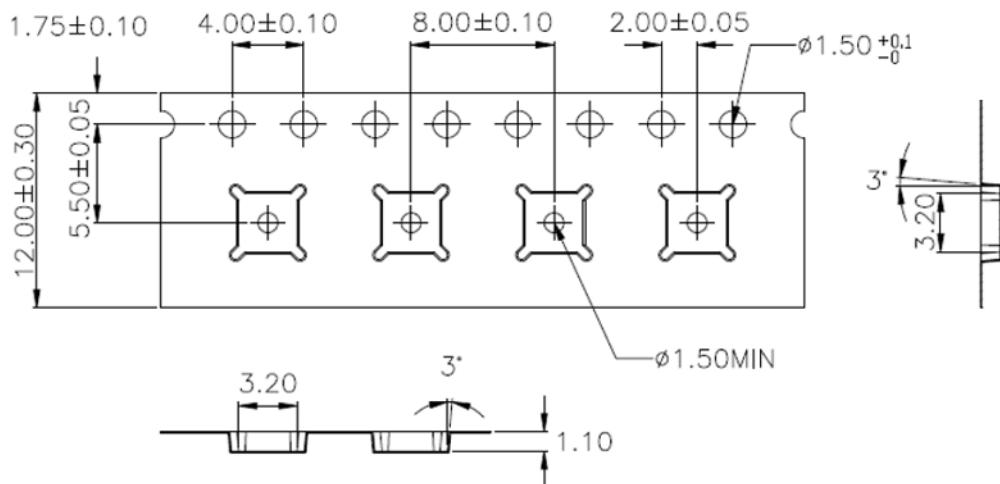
3 x 3 mm² Tape Dimensions (TYPE I) (for package height 0.9 mm and 1.0 mm)
